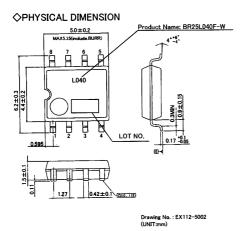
(a) PHYSICAL DIMENSION SOP8 (BR25L040F-W)
